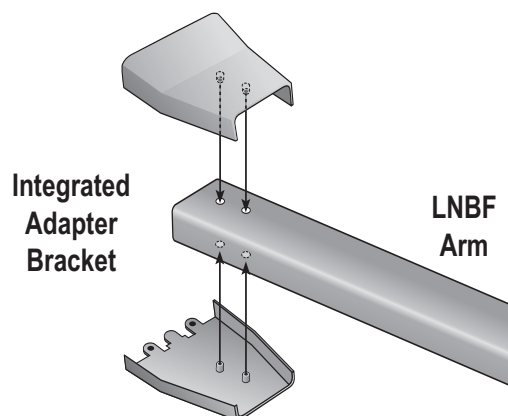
Bracket posts fitting into LNBF arm (bolt holes removed for clarity)
